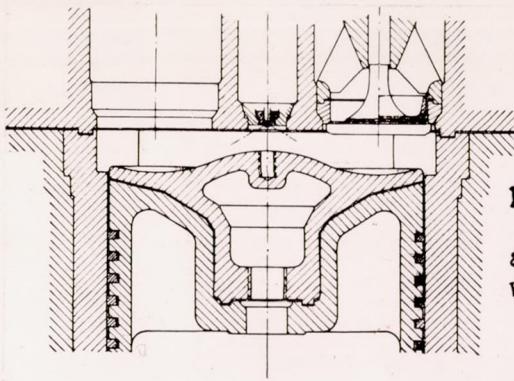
Combustion space of a Krupp mechanical injection engine with mushroom piston head.
